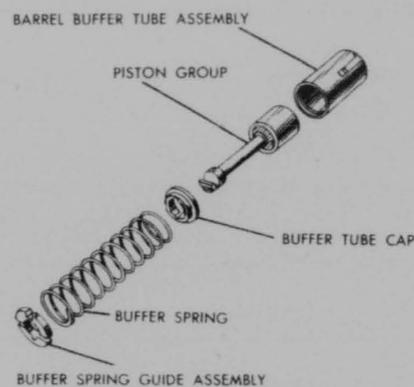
Barrel Buffer Assembly C7312663—Partly Exploded View.
